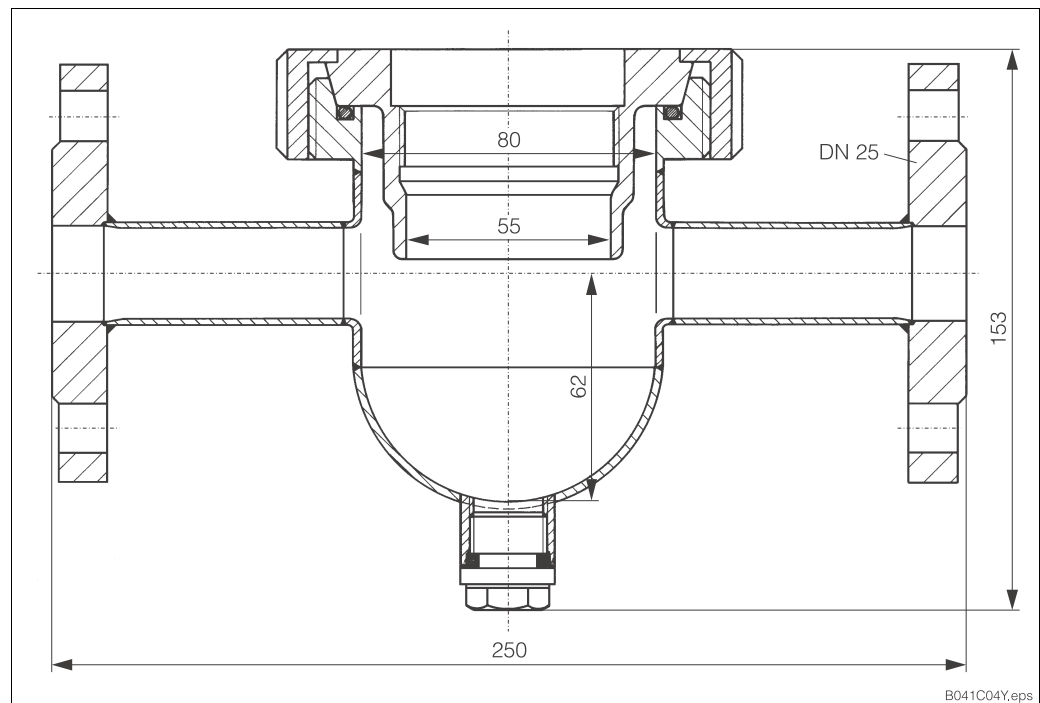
CPA 250-S13 for compact electrode system CPA 320, material SS 316Ti, with flange DN 25
